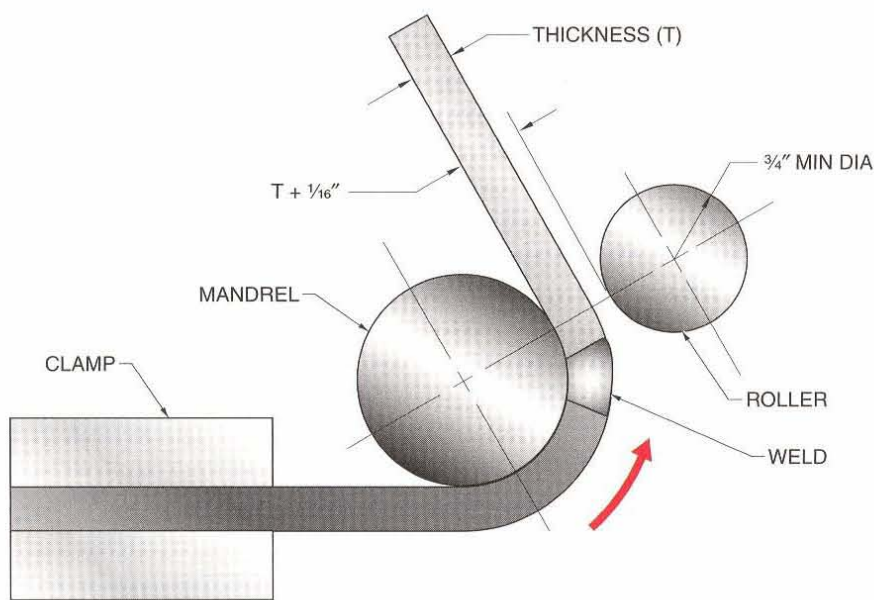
A wraparound guided bend test uses a roller to ensure that the specimen bends to the correct radius around the mandrel.
